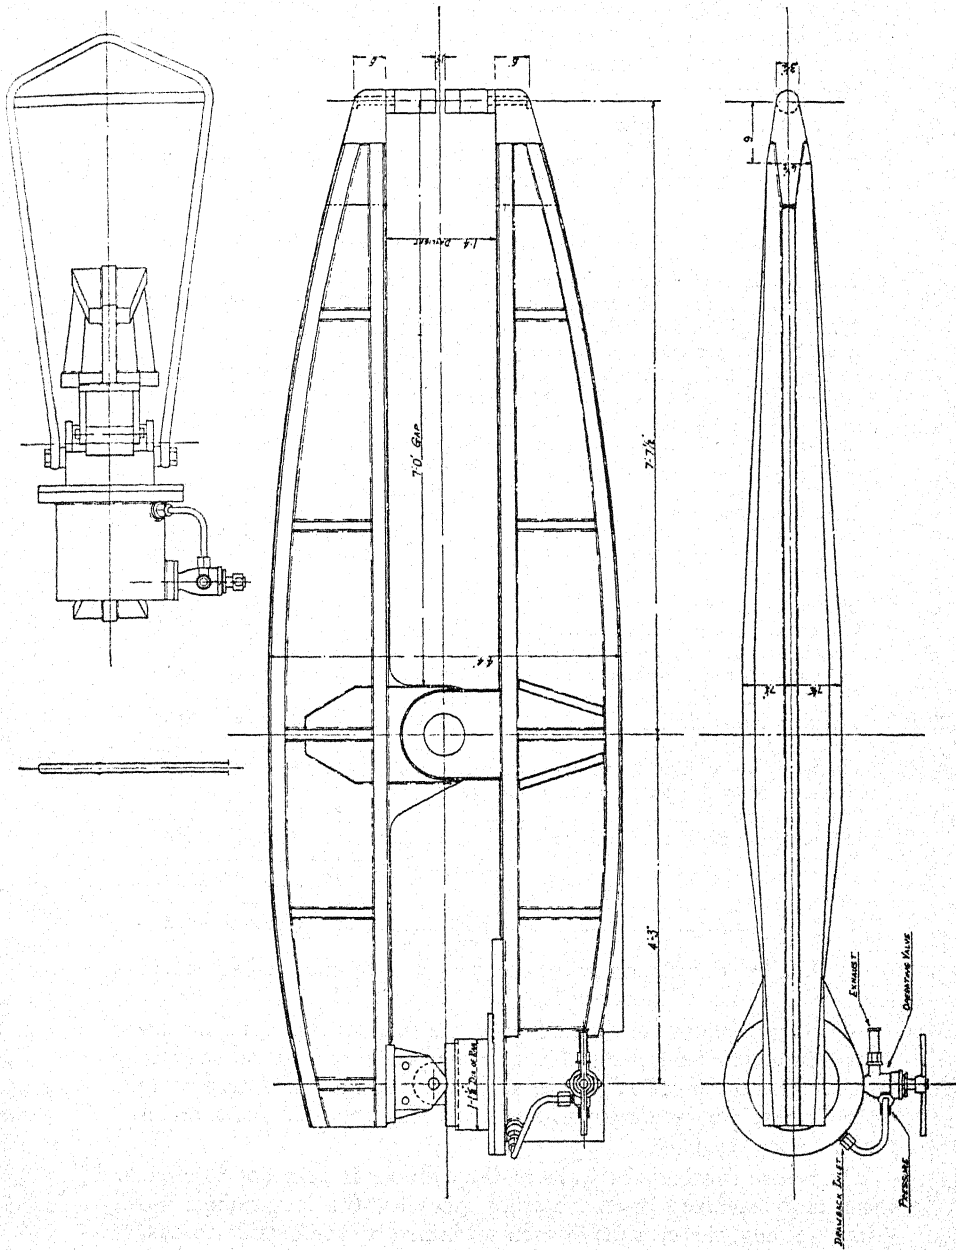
Design of riveting machine for arc welded construction.
